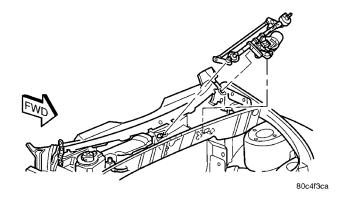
FRONT WIPER MODULE - REMOVE/INSTALL
